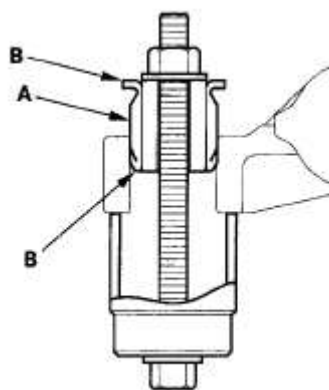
Identifying Gearbox Housing, Washer, Flange Bolt And Nut
